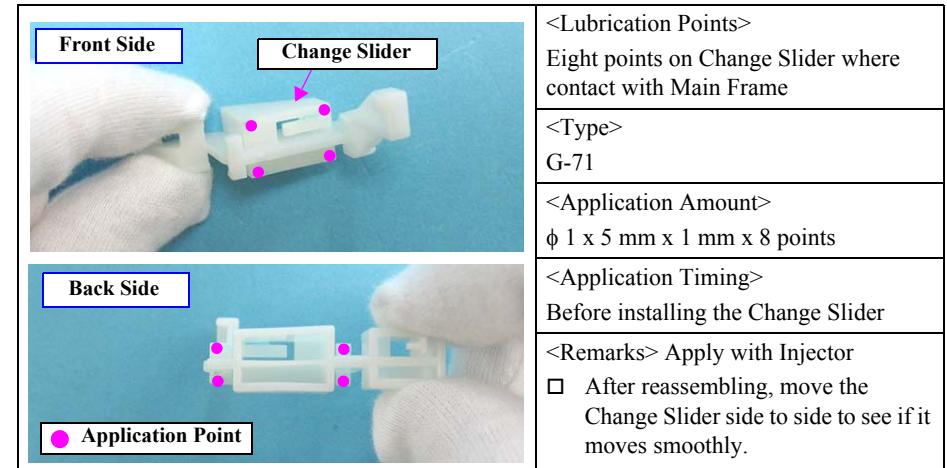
Lubrication of the Rear Paper Guide (1)
